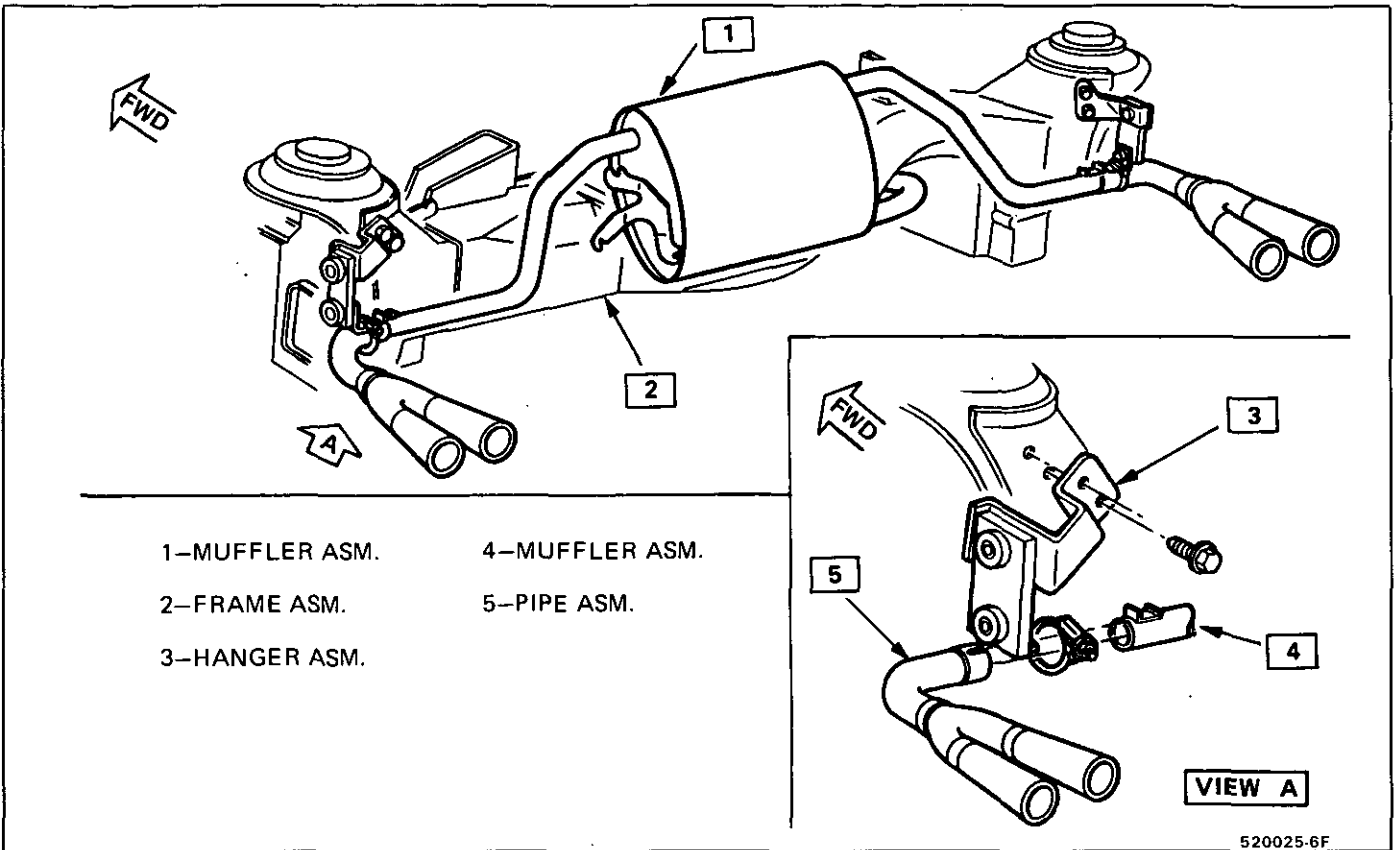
Muffler Assembly and Tailpipe Extension (LR8)
